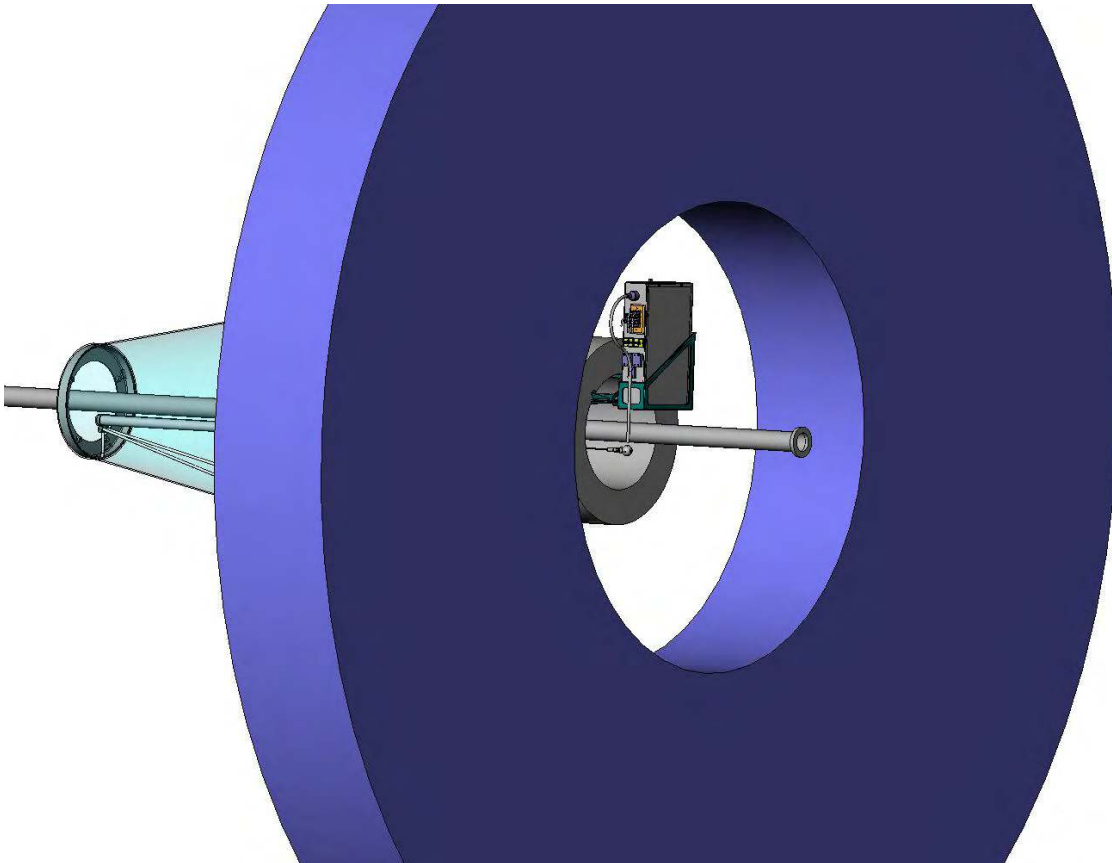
Telescope mechanical housing and positioning head. The MIMOSTAR-2 flex cables will be glued to the aluminum support and positioning brackets.
